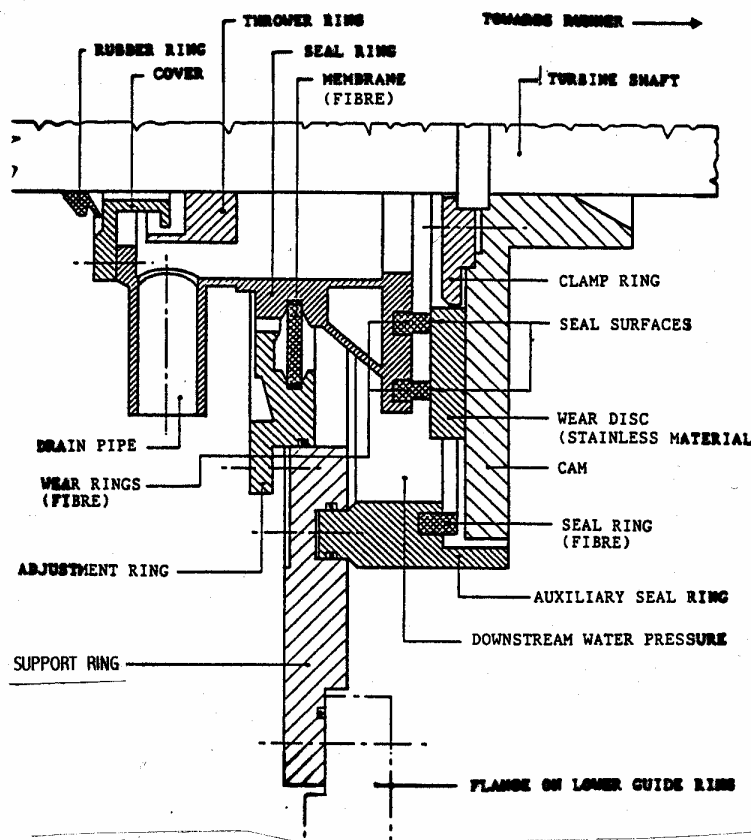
Shaft seal box (Courtesy of Kvaerner Brug)
